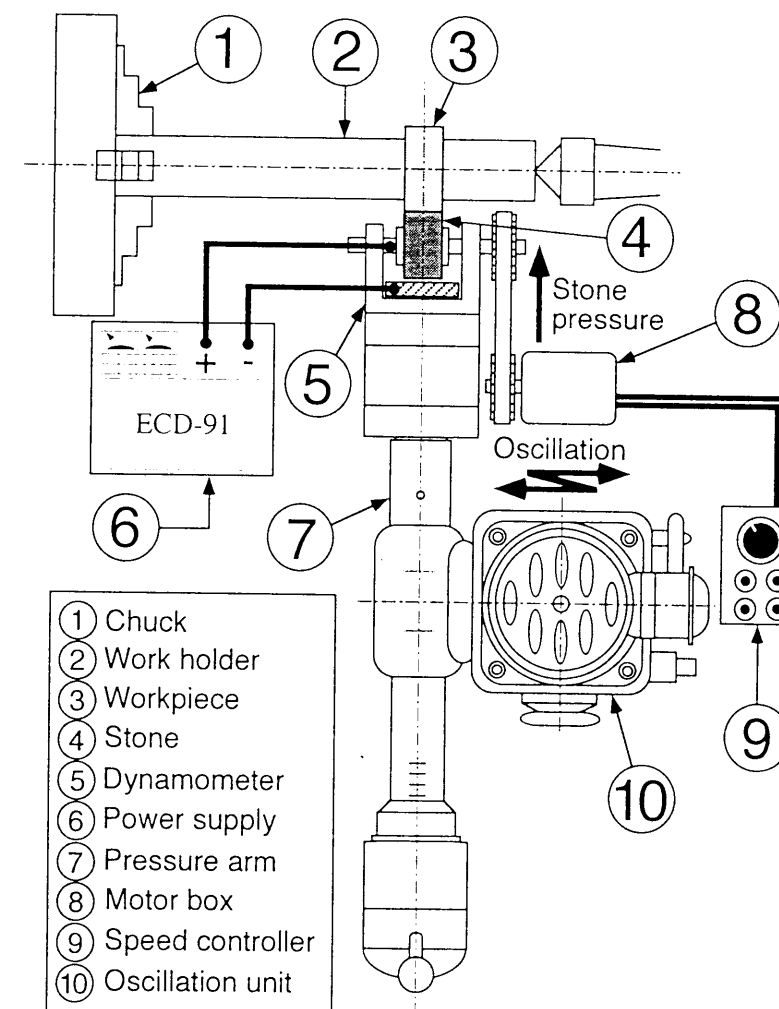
Schematic illustration of main part of superfinishing machine
